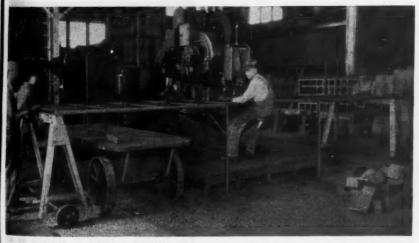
These racks hold the sheet steel at the correct height for feeding to the punch press.
